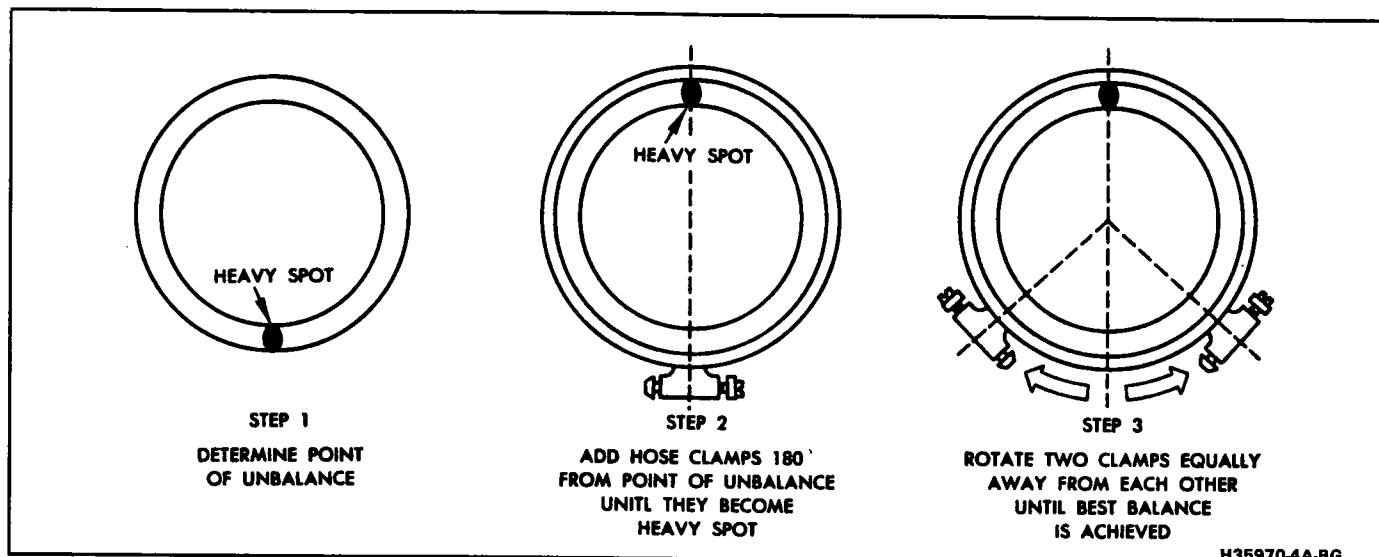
Positioning Hose Clamp to Achieve Best Balance
